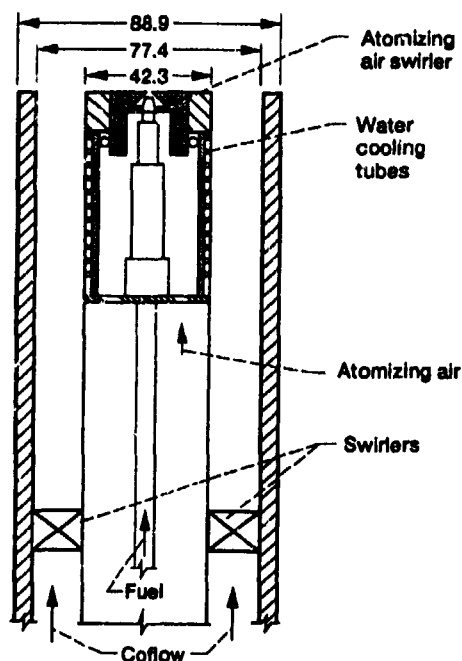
Schematic drawing of the combustor. Dimensions in mm.
